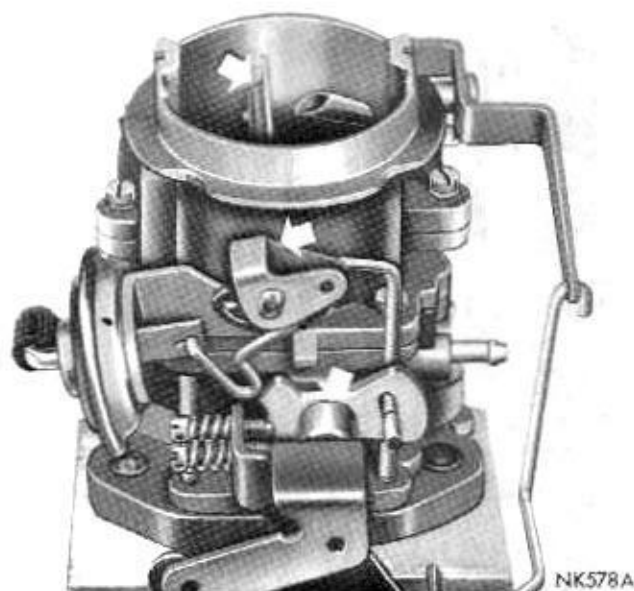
Choke Valve Shaft and Fast Idle Cam
